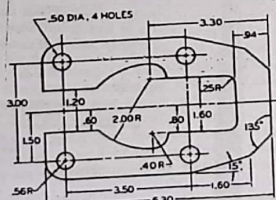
Latch Plate. Using Layout A-2 or A4-2 (adjusted), draw in pencil. Omit dimensions and notes.
